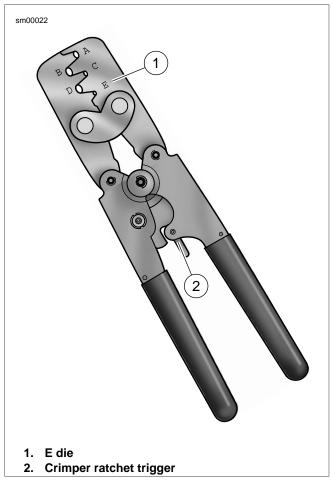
Packard Terminal Crimper (HD-38125-7)
